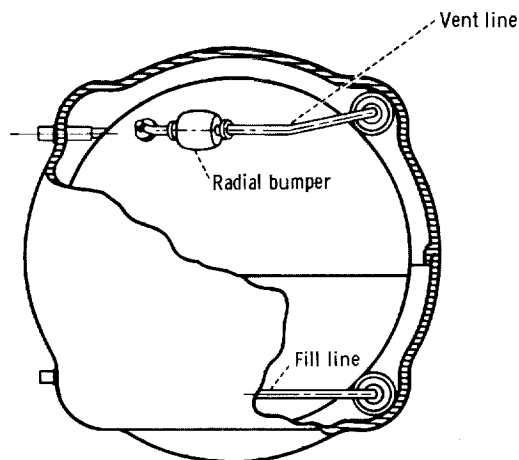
Typical discrete-shield radial-bumper cryogenic gas storage tank.
